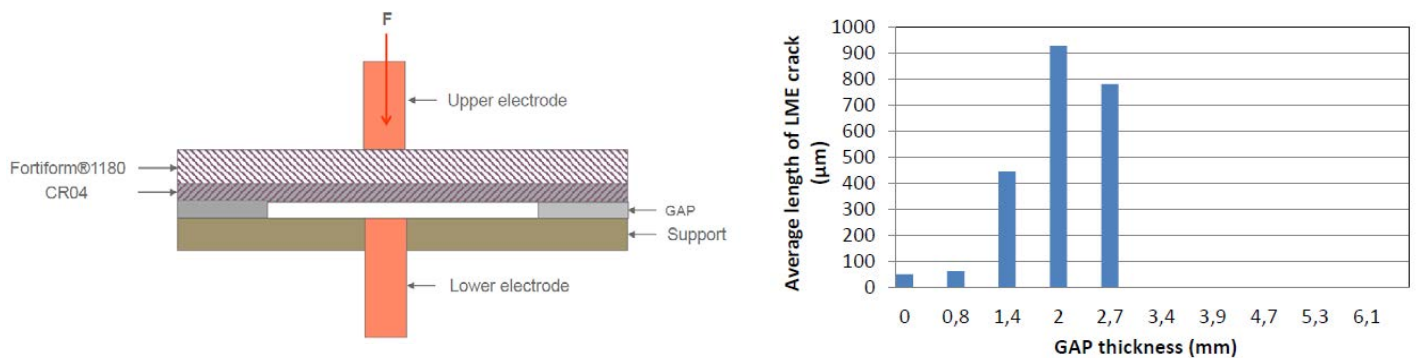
Impact of the clearance between the welding electrode and the sheet on LME significance.
